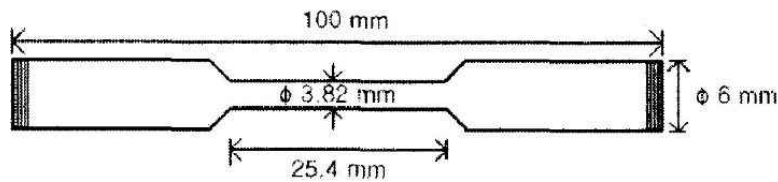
Dimensions of the tensile specimen⁶⁾.
